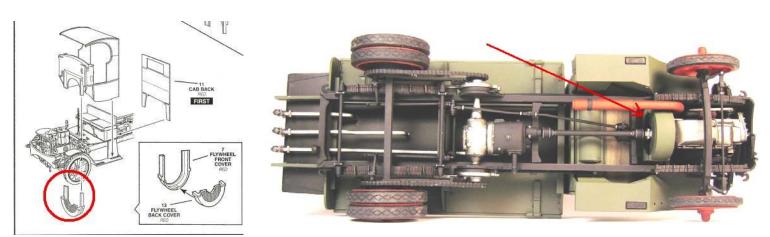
An error in the plans indicates that the flywheel cover (parts #7 and #13) in Step 7 should be installed backwards. As visible in Figure 11, it should fit snug to the flywheel housing.
